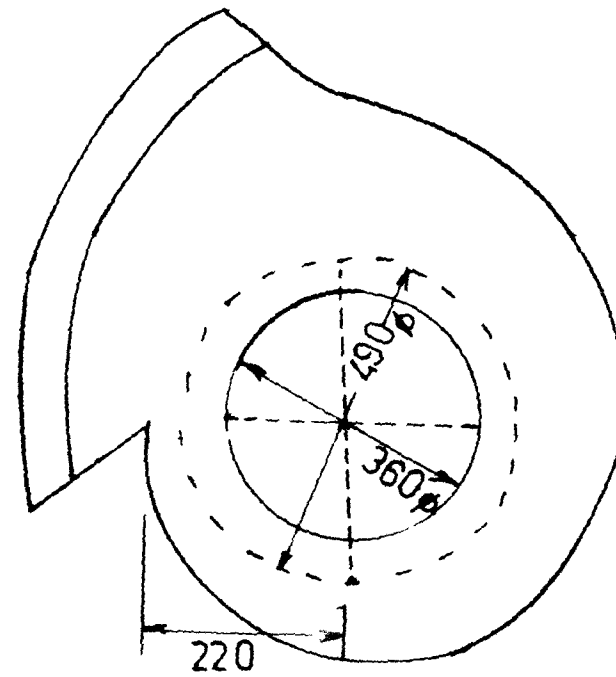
SCHEMATIC VIEW OF IMPELLER OF NEW DESIGNED BLOWER
